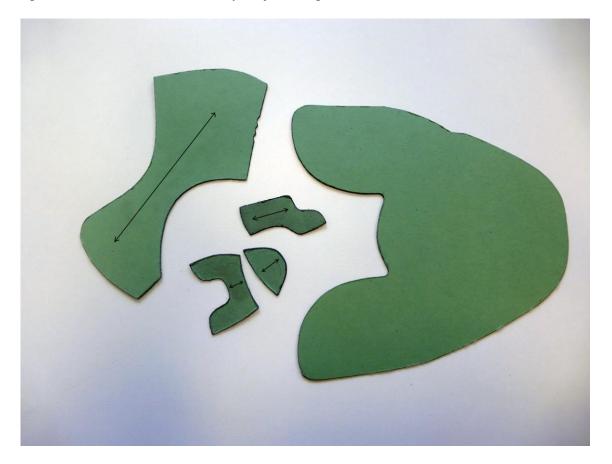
40x50 cm card board "leather hide" with cutting layout done by a trainee (miniature shoe parts)
